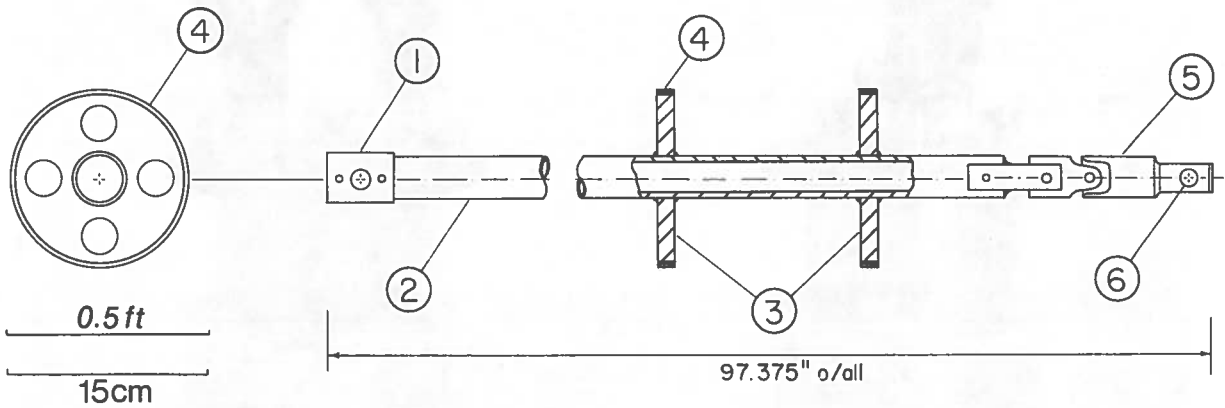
Connecting rod for reamer attachment. (1) Connection to clutch output shaft (see Fig. 1c item no. 21). (2) Main shaft. (3) Bearing wheels. (4) Teflon surface. (5) Universal coupling. (6) Connection to reamers.
